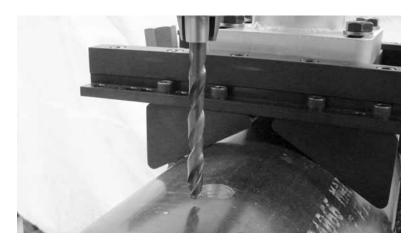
Lower the spindle and check the drill's alignment with the marked drilling location.
